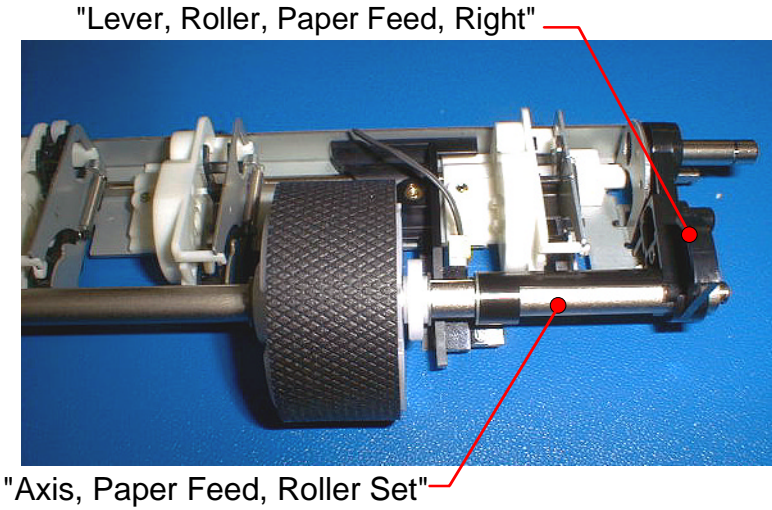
Installing Right Side of "Axis, Paper Feed, Roller Set"
